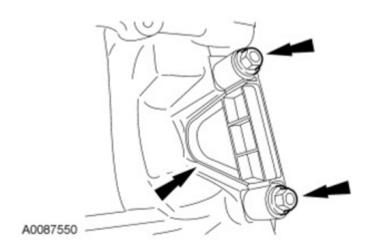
Locating Block-Off Plate Bolts Courtesy of FORD MOTOR CO.
